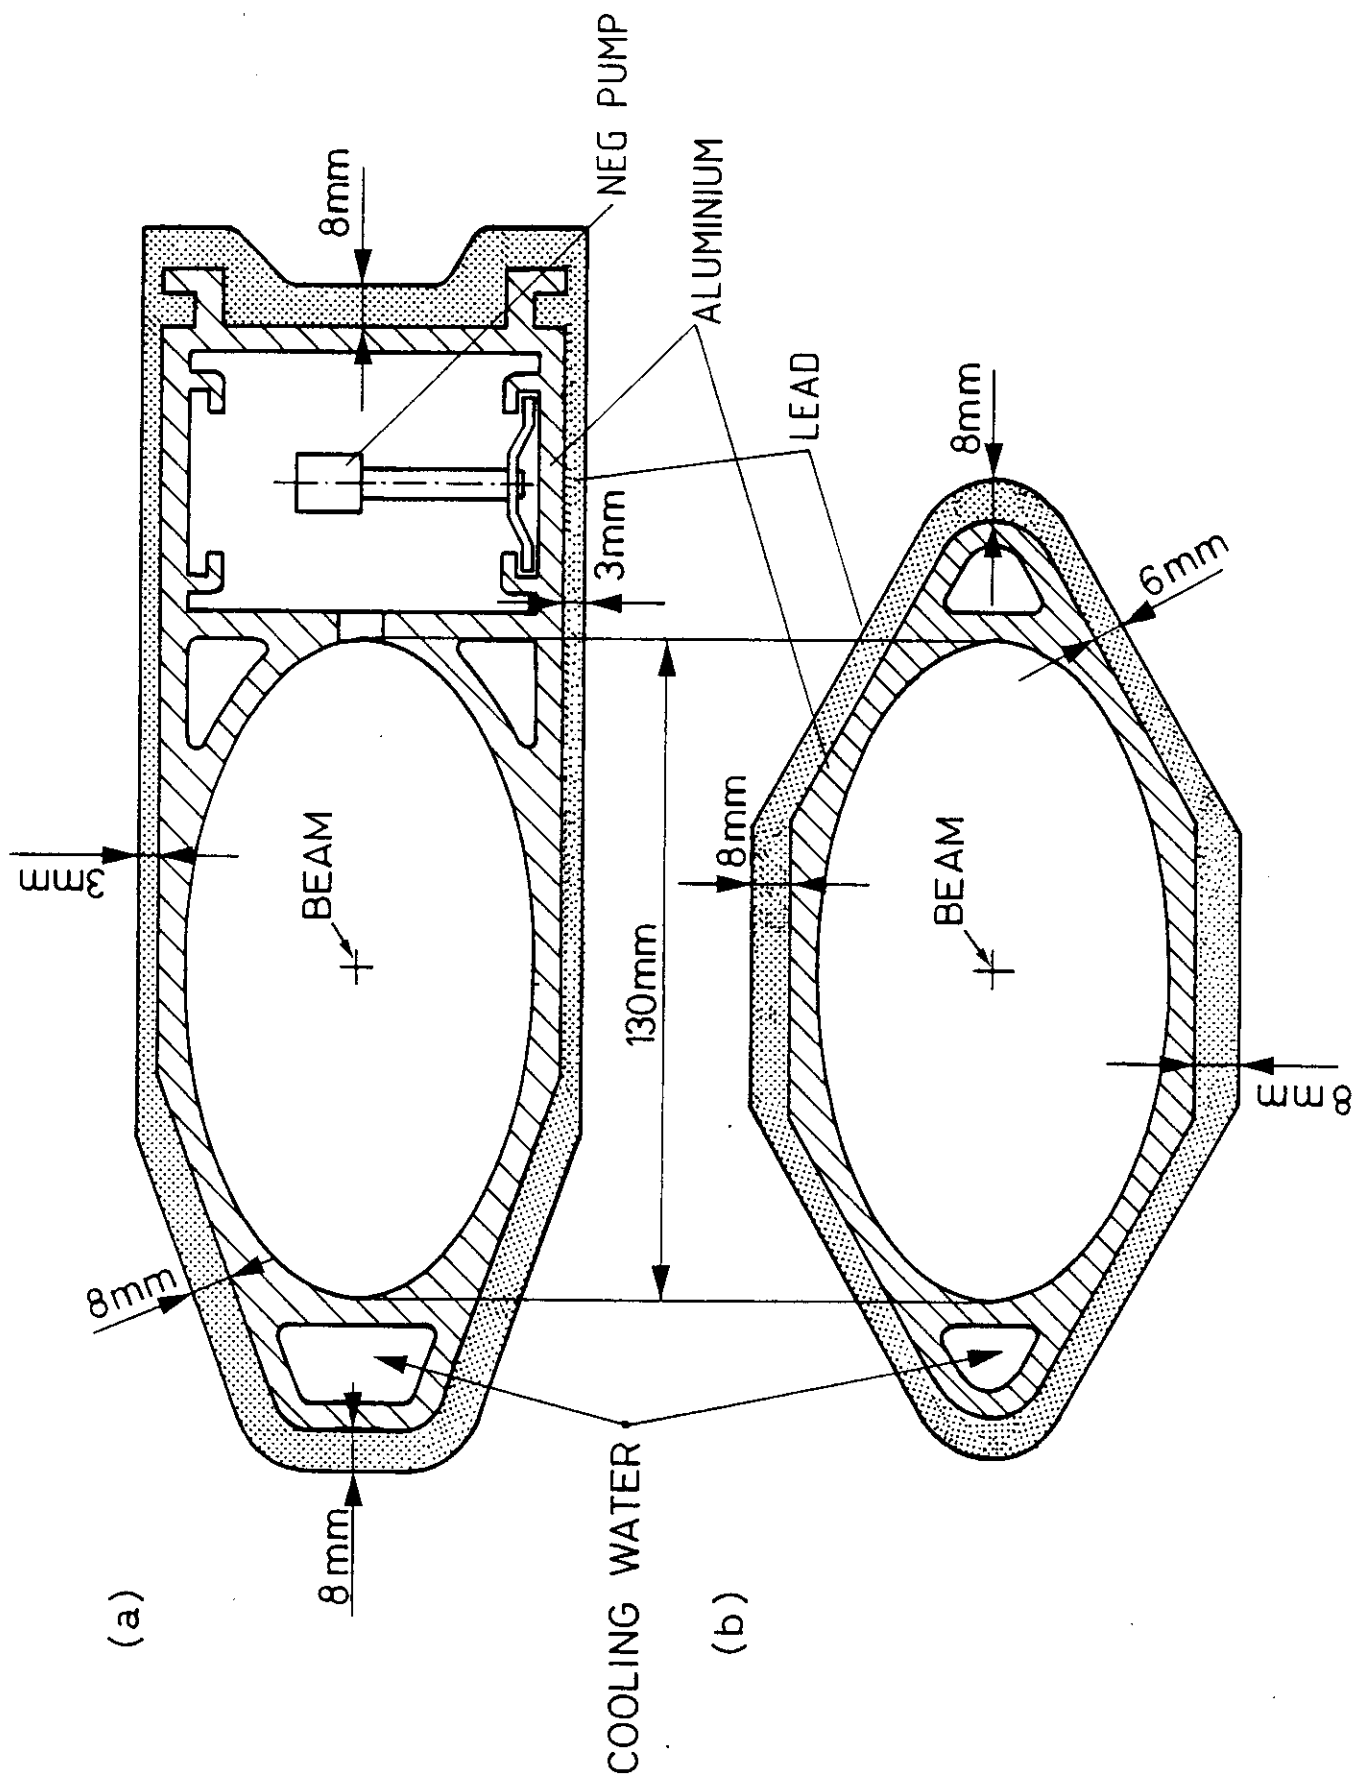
Design of LEP vacuum chambers to be used in (a) dipole and (b) quadrupole magnets, showing lead shielding.
